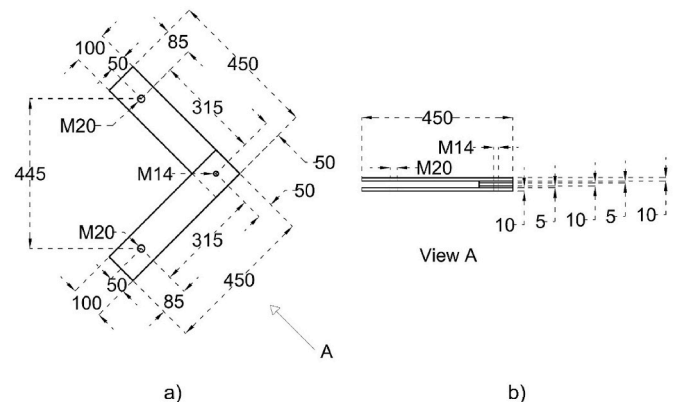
Angle joint specimen dimensions in mm from a) top view, b) side view.
